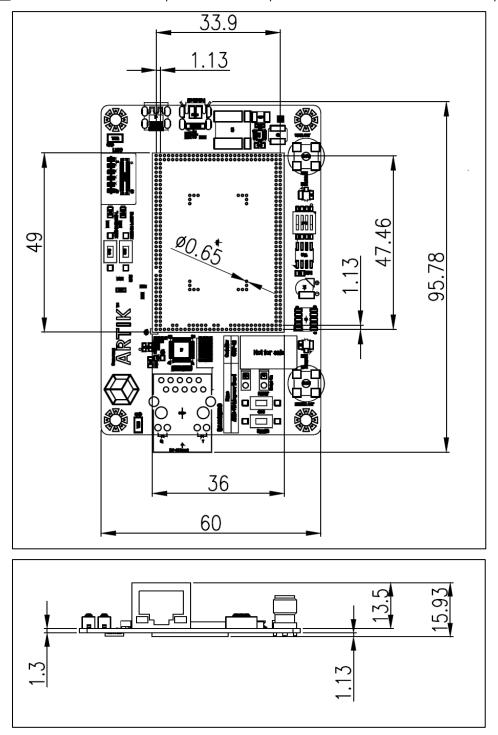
Mechanical Drawing ARTIK 530 Development Board and Interposer Board all dimensions are in [mm]
